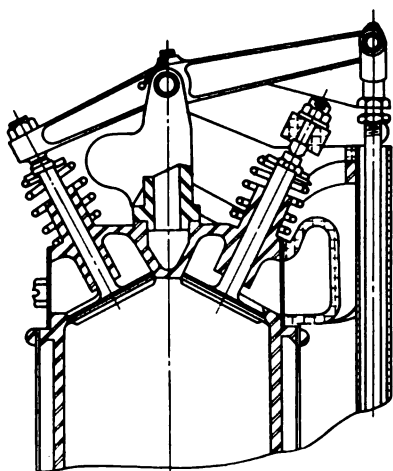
Cross-section of OXX-6 cylinder, showing water jacket, cylinder head and construction.
